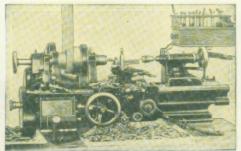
Making Small Screws on Quick Change Gear Bench Lathe.
